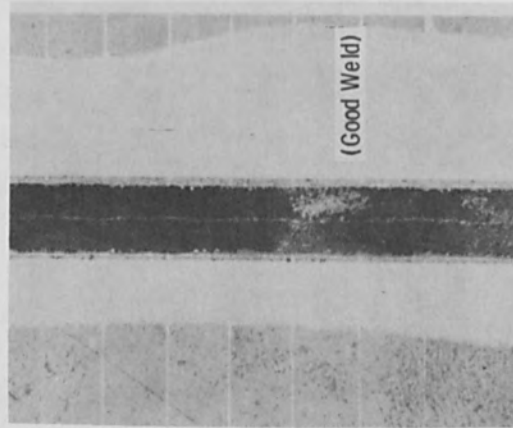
NONVACUUM ELECTRON BEAM WELDS IN 1/8" THICK Ti-6Al-4V ALLOY WITH 7.8 kW, 5/16" STANDOFF AND 240 IN./MIN. WELDING SPEED.
